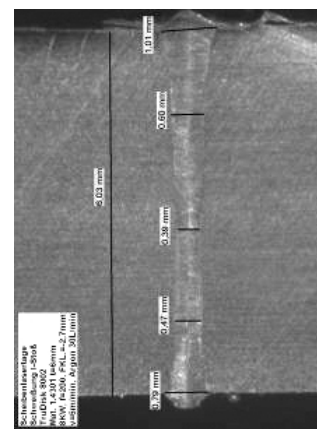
Typical disk laser welding seam geometry with a high aspect ratio (stainless steel, thickness 6 mm, welding speed of 6 m/min)
